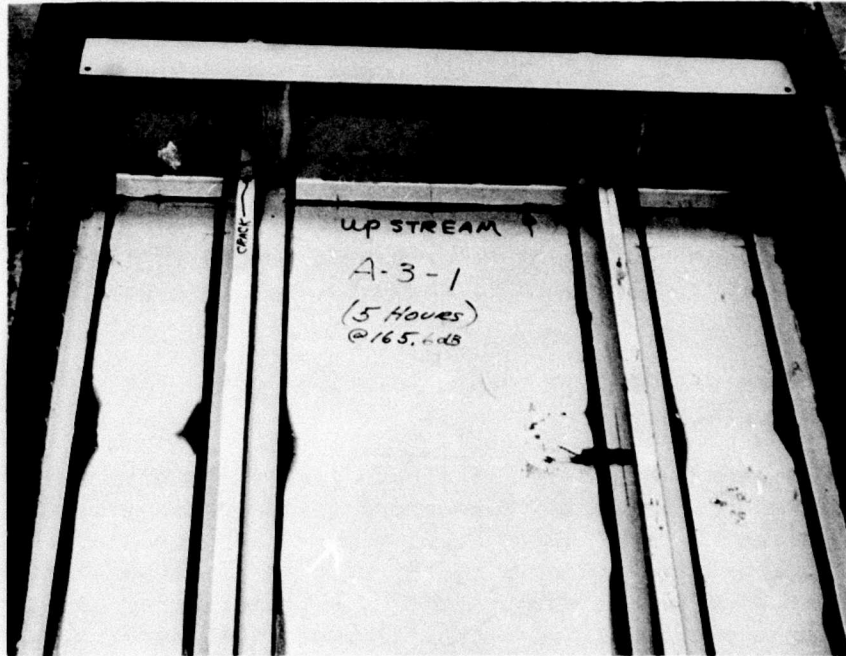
Fatigue Failure in J-Section Stiffener of Panel A-3-1
